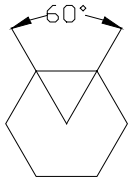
Angle for a single flat on the hexagonal bolt head on the adjusting screws (KX) and (KY).
